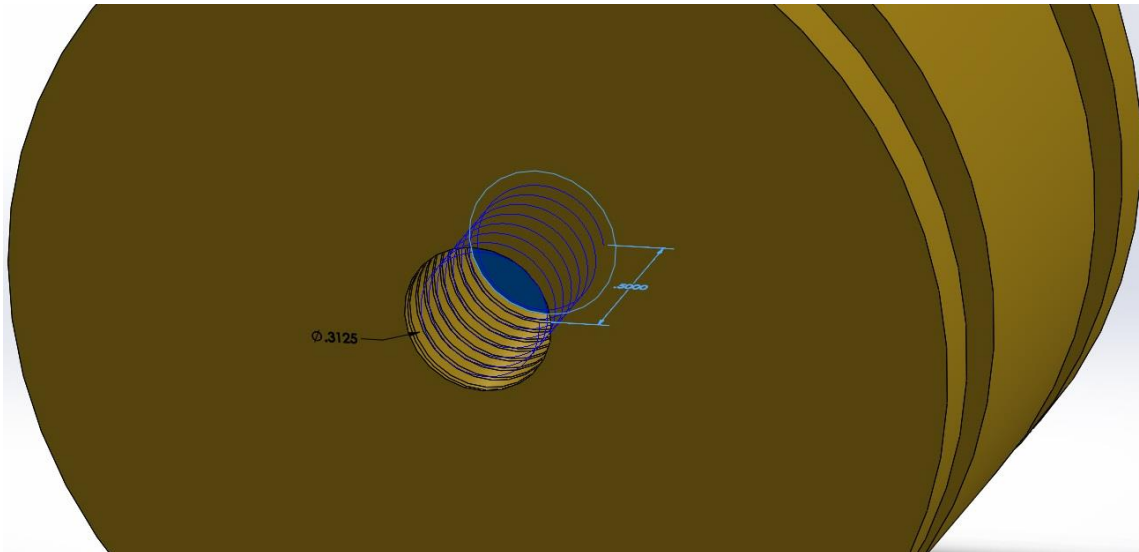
Dimensions of the threaded hole cut in the center of the front face of the brass stopper.
